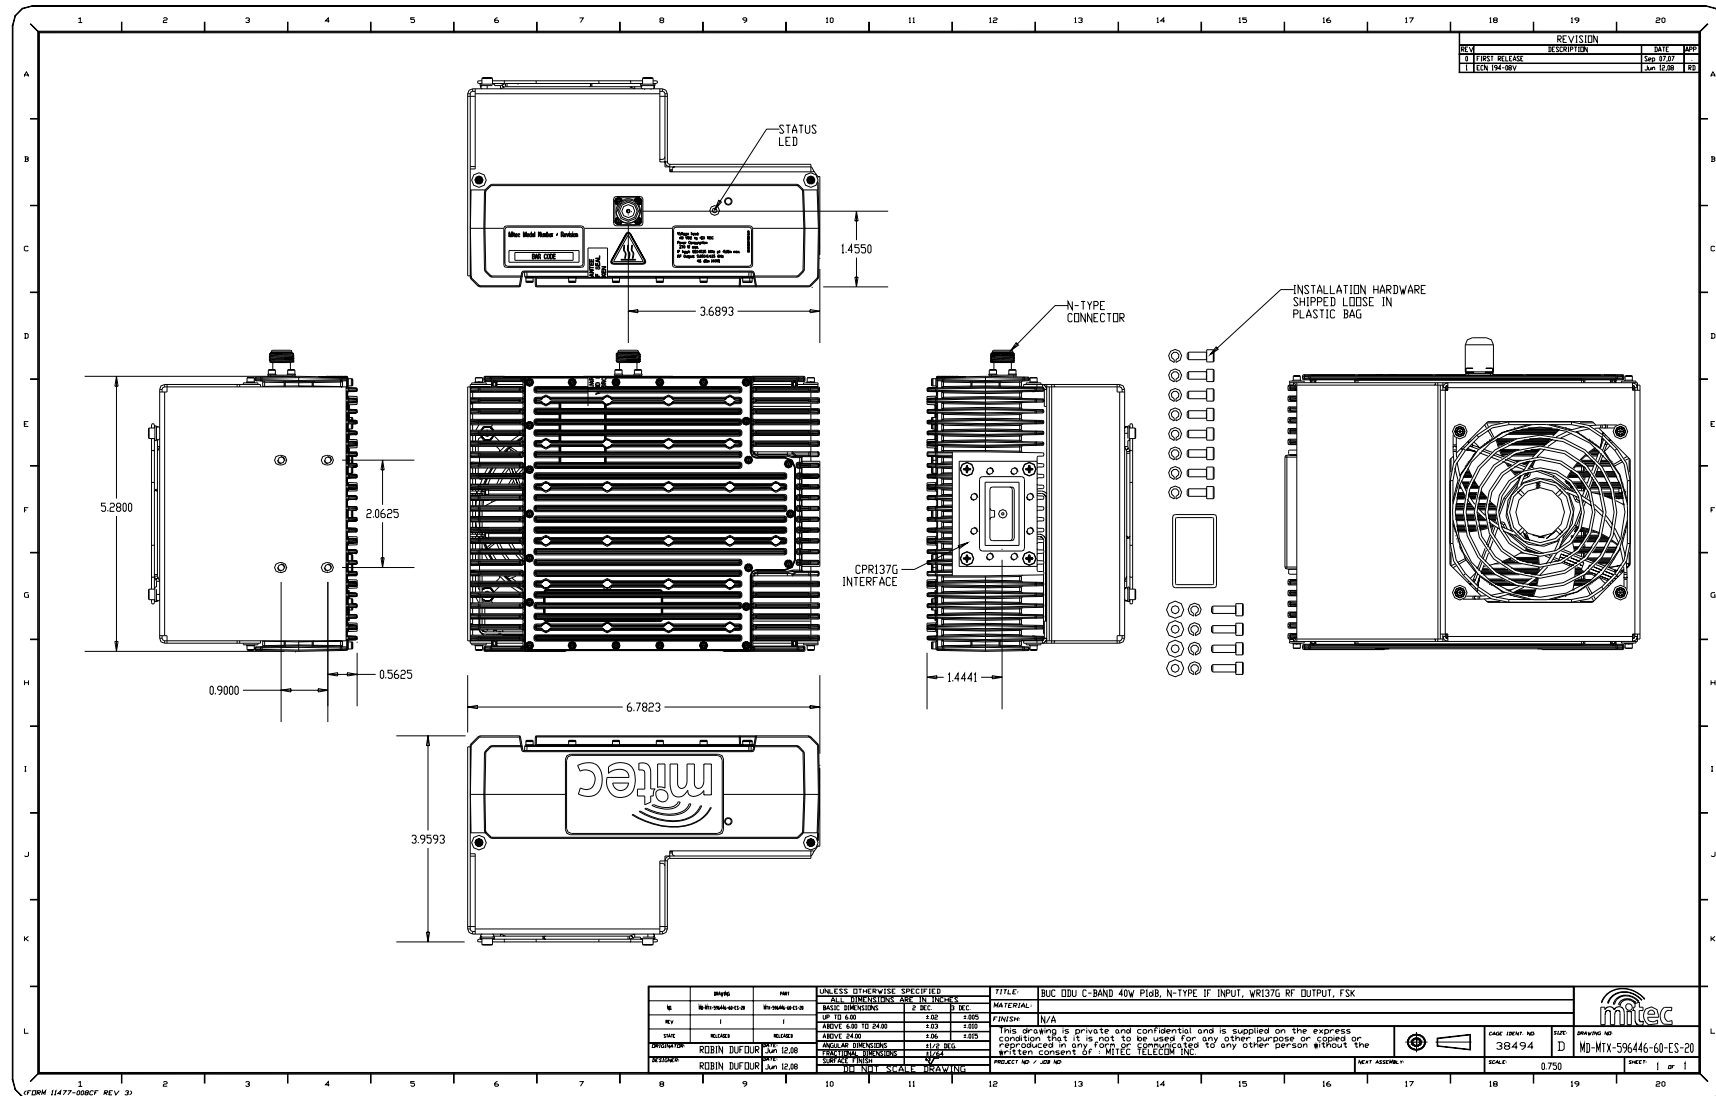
MTX-596x40-60-ES-20 - Outline drawing
